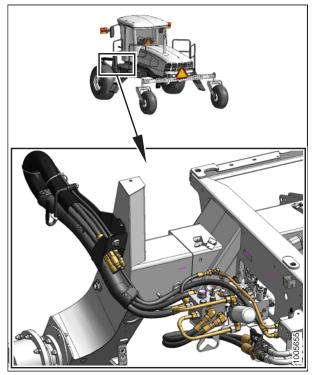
Auger Drive Basic Kit and Completion Kit Installed
